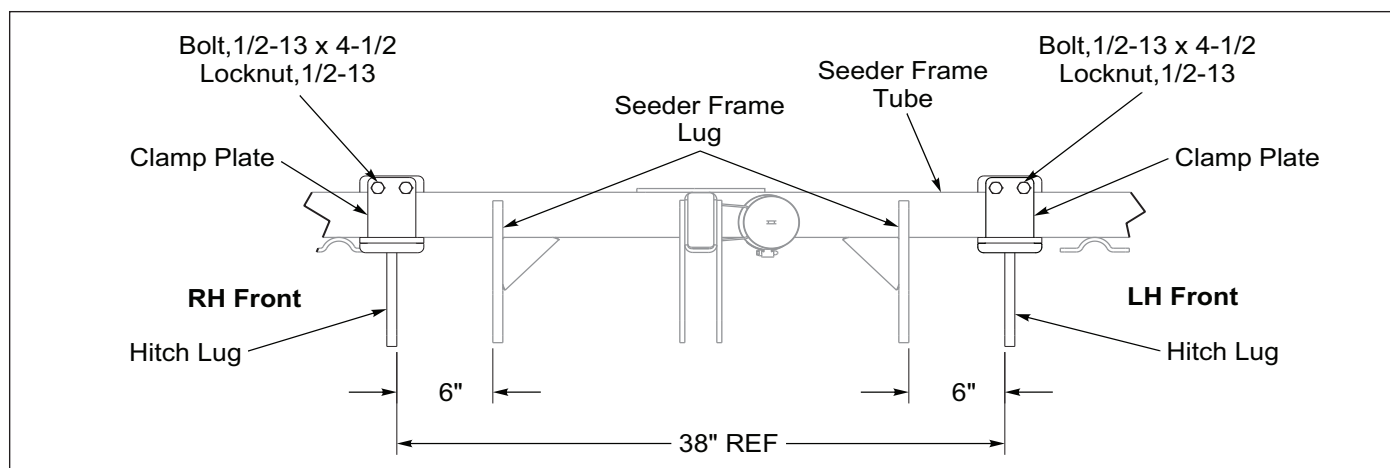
Quick Hitch Adapter Kit - Dimensions
